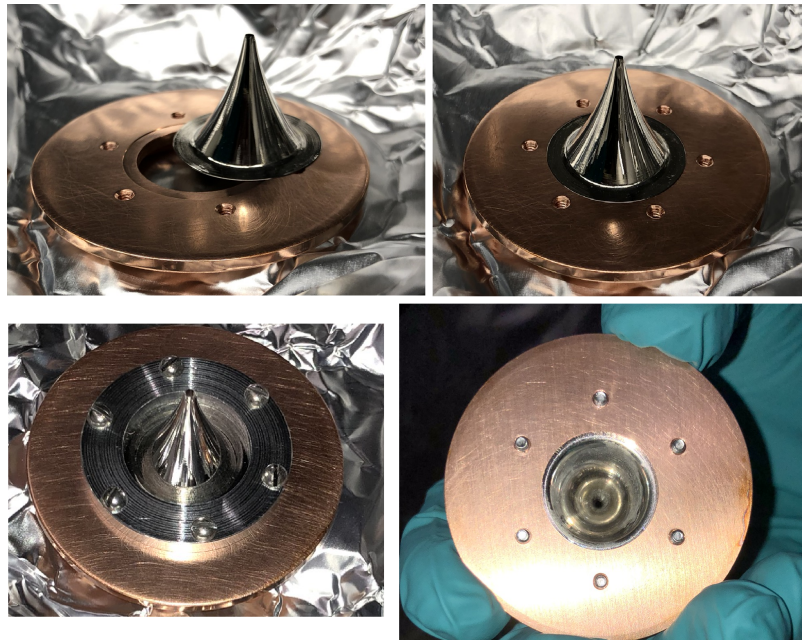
Assembly pictures of the new skimmer holder. The placement grooves for the skimmer to slide into can be seen in the top left. Skimmer in place without clamping can be seen in top right. The finished assembly can be seen in bottom left (front face) and bottom right (back face). The depth of the lip in the copper piece is 0.1 millimeters. The diameter of the copper piece is 0.05 meters.
